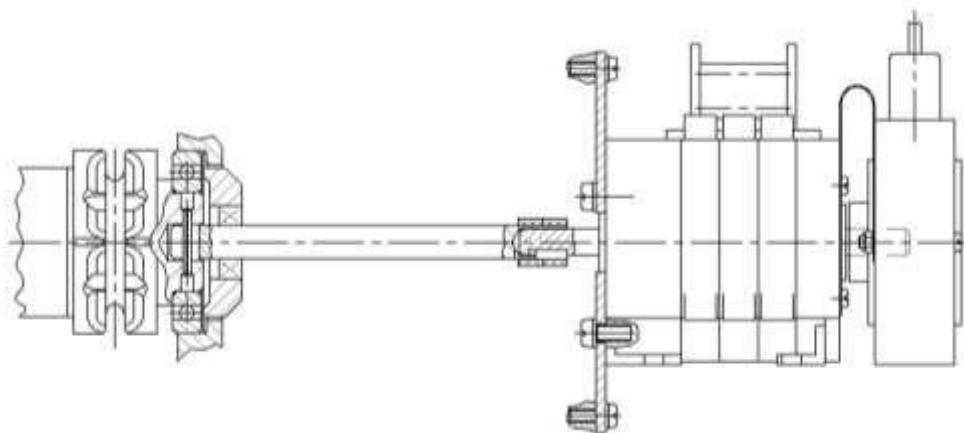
Incremental encoder on the geared limit switch of the drive shaft
